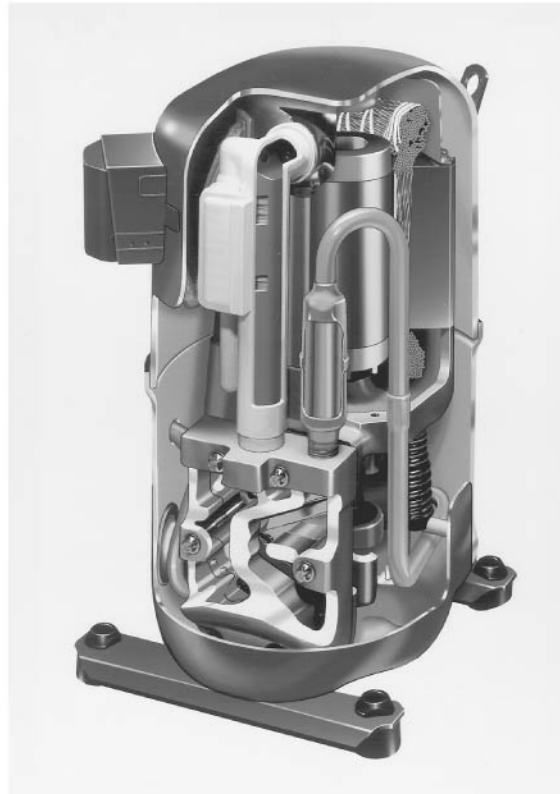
Cutaway drawing of a hermetic reciprocating compressor. (Courtesy of the Copeland Corporation, Sydney, OH.)
